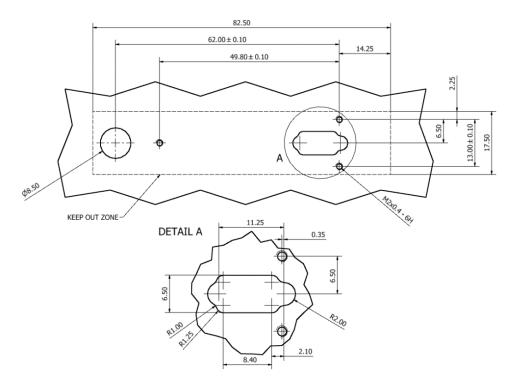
Panel cut-outs required to mount CubeMag Deployable
